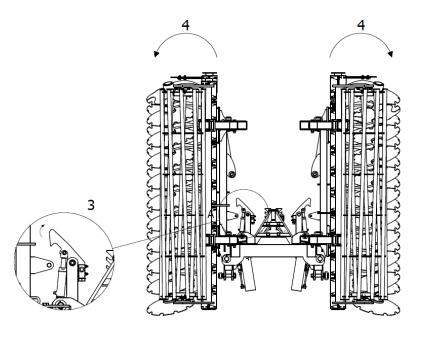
Implement opening sequence: 3- release the hook of the hydraulic side extension lock mechanism, 4- open the implement side extensions.
